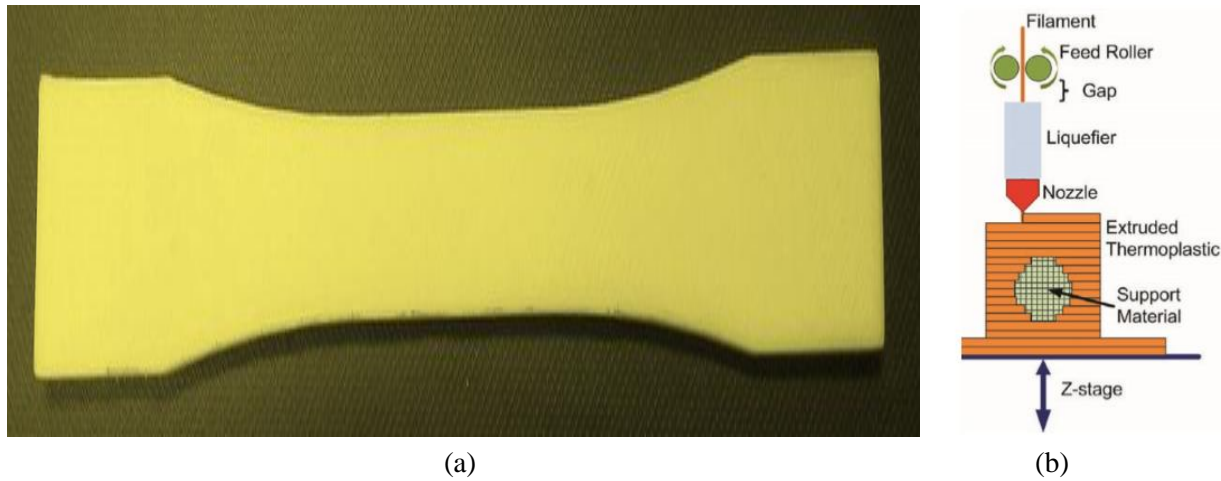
(a) Fabricated PLA tensile specimen, (b) working mechanism of FDM(8).
